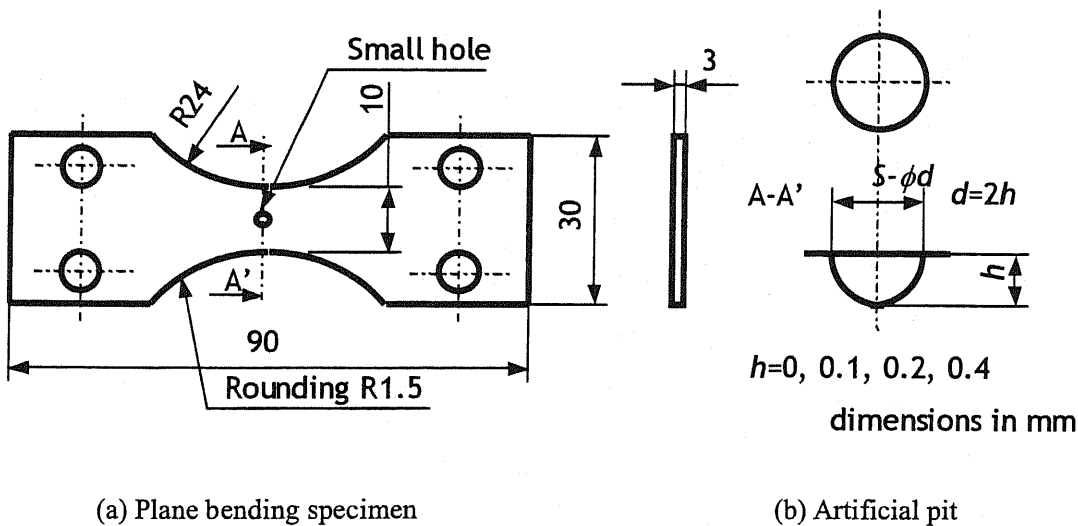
Shape and dimensions of specimen and etched hole.
